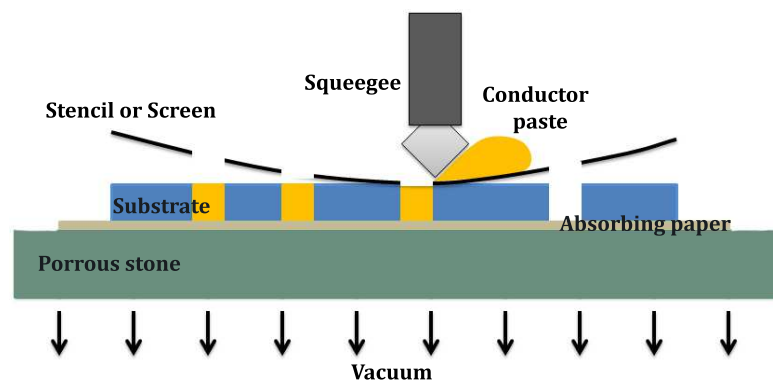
Filling via holes of LTCC sheets with stencil/screen printing technique
